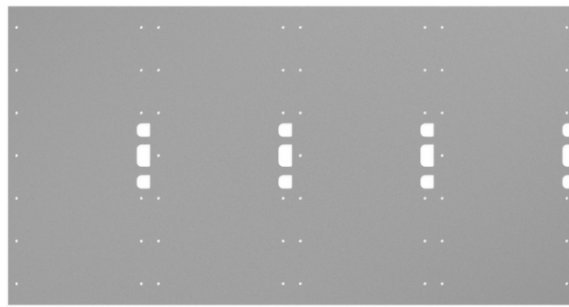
Example layout of the CNC machining to be performed on stainless steel sheets
